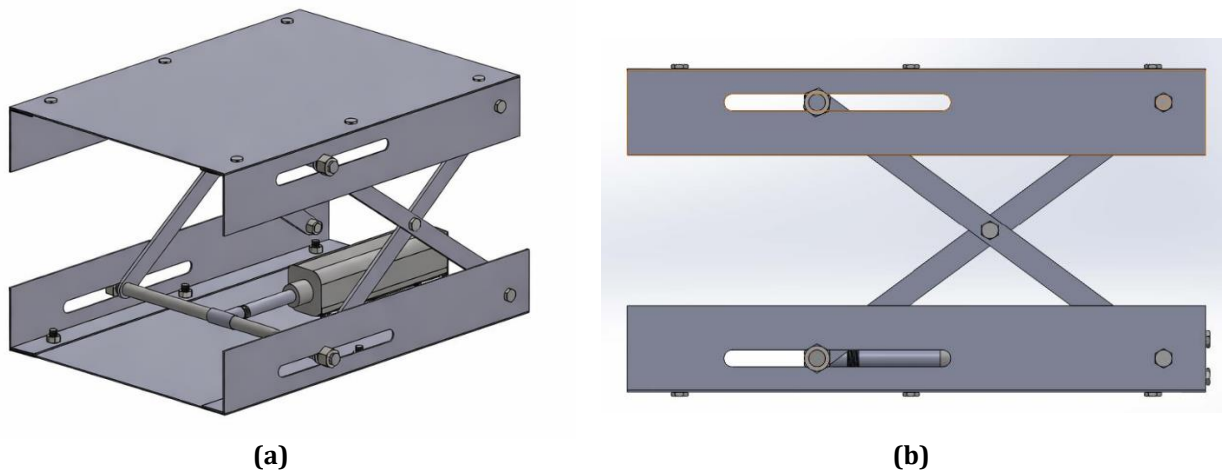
The assembled CAD models from (a) An isometric view; and (b) A side view with the base platform of 360 mm x 550 mm, AISI 1020 Mild Steel
